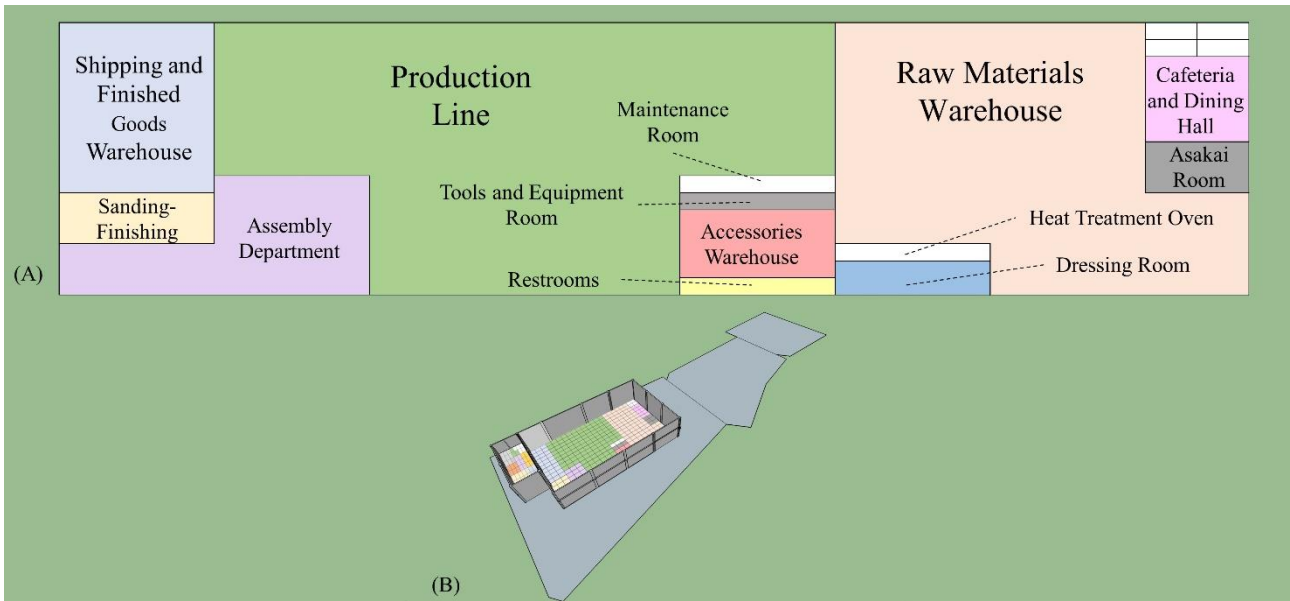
(A) Arranged department layout of the production floor. (B) Placement of the production floor layout into the 3D model of the facility.
